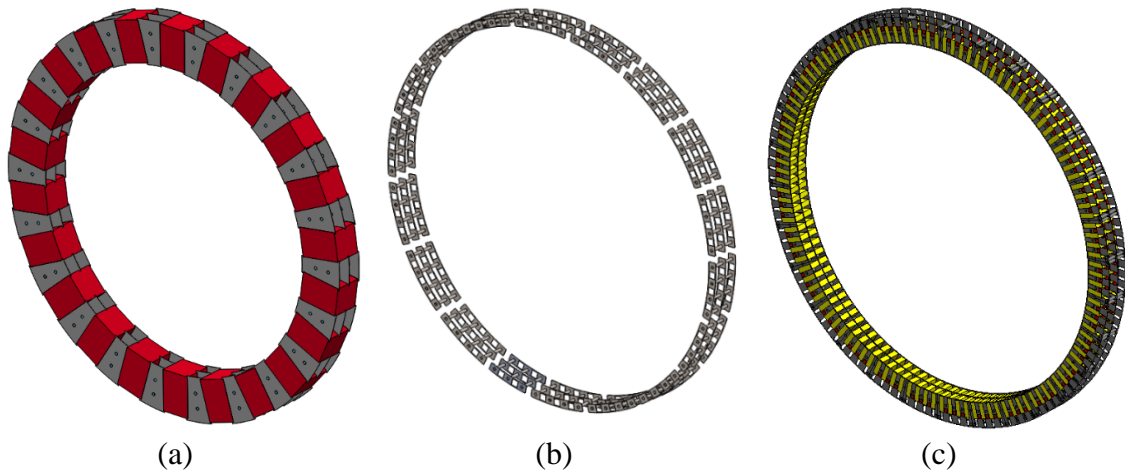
Assembly models of the (a) Inner, (b) cage, and (c) outer rotors of the MSMG stage 1, cut in half in axial direction due to symmetry.
